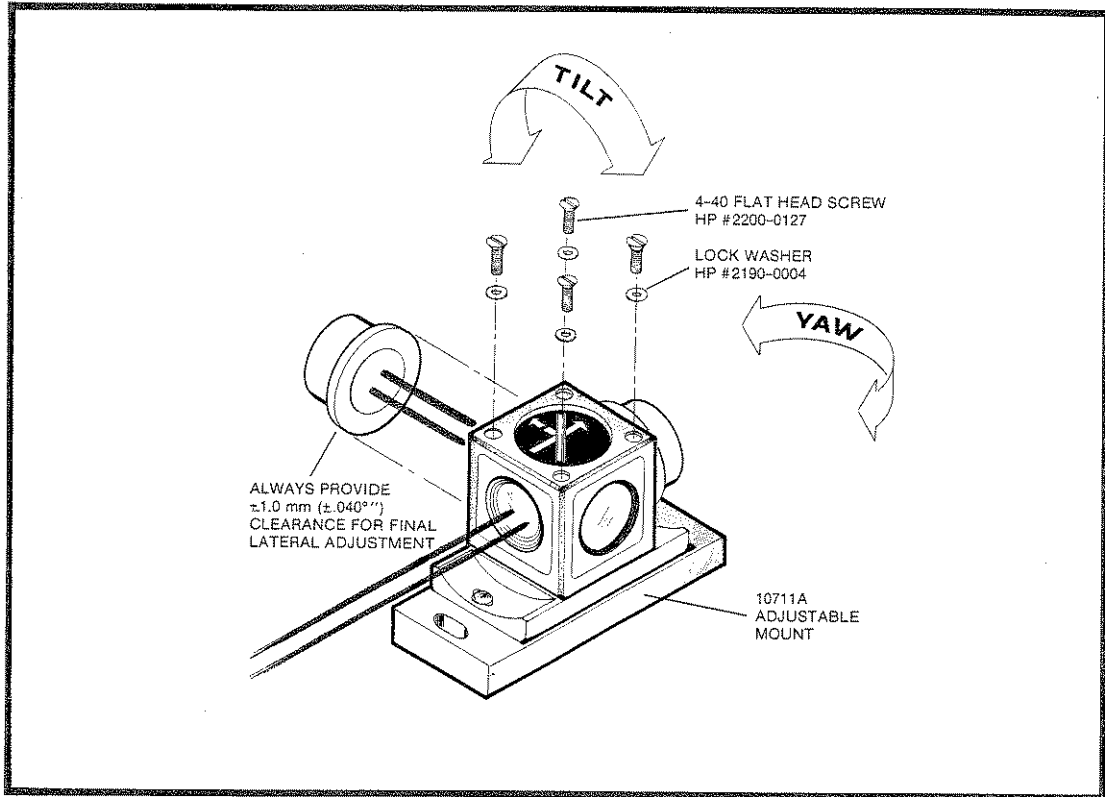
Horizontal Plane Mounting Using the 10711A Adjustable Mount
